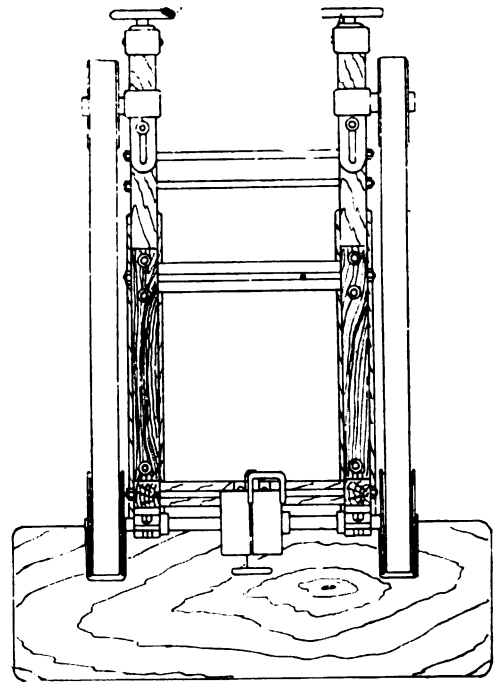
The machine may be constructed to use but one belt, although it is better practice to employ two belts
